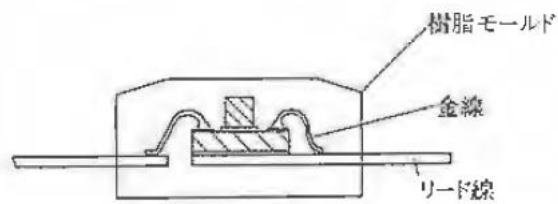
Cross-sectional view of a resin-packaged Hall element (HW-300A)
